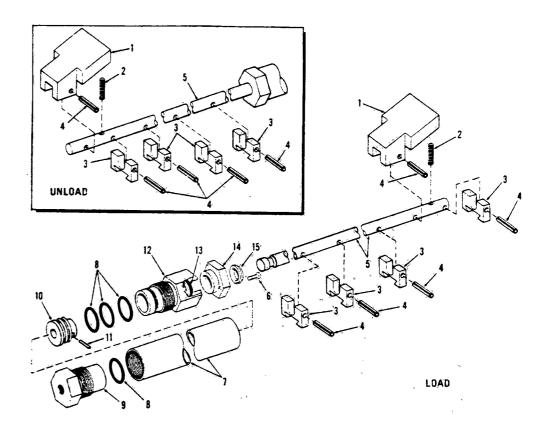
CYLINDER ASSEMBLY: Loading And Unloading.
